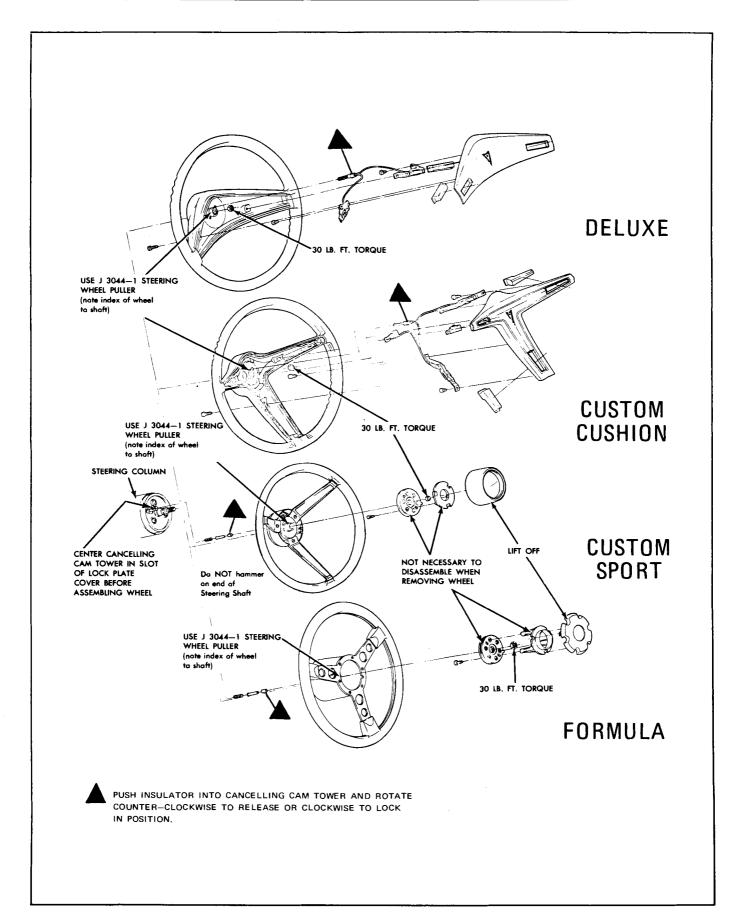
Exploded View of Steering Wheel and Horn Button
